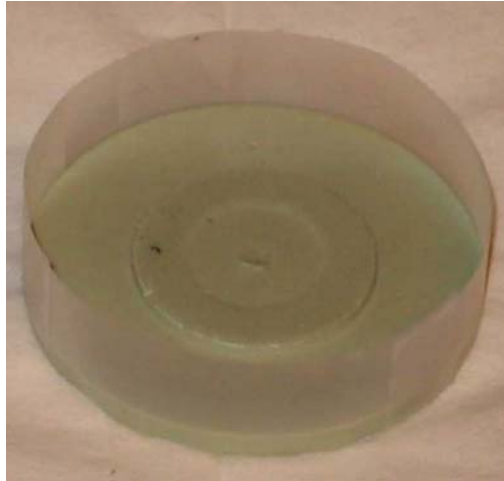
Taped Silicone Mold Ready to Accept Molten Wax
